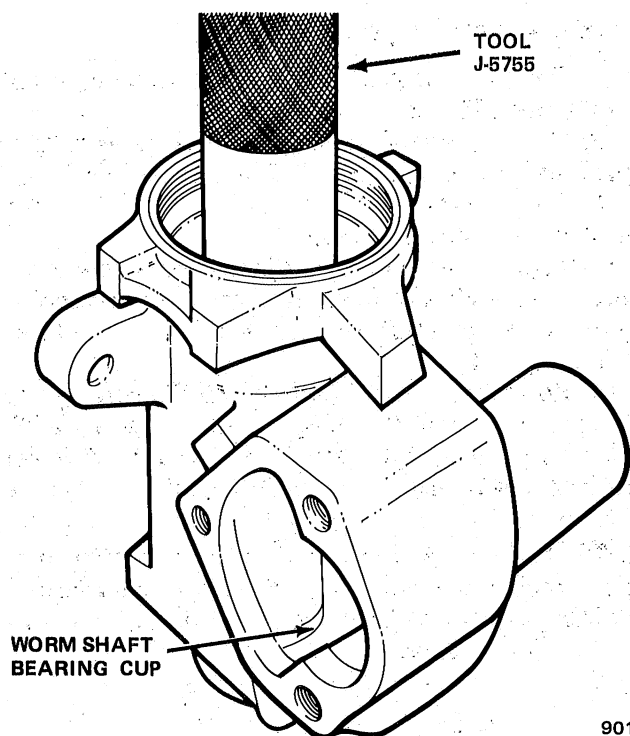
K-14 Installing Wormshaft Upper Bearing Cup
